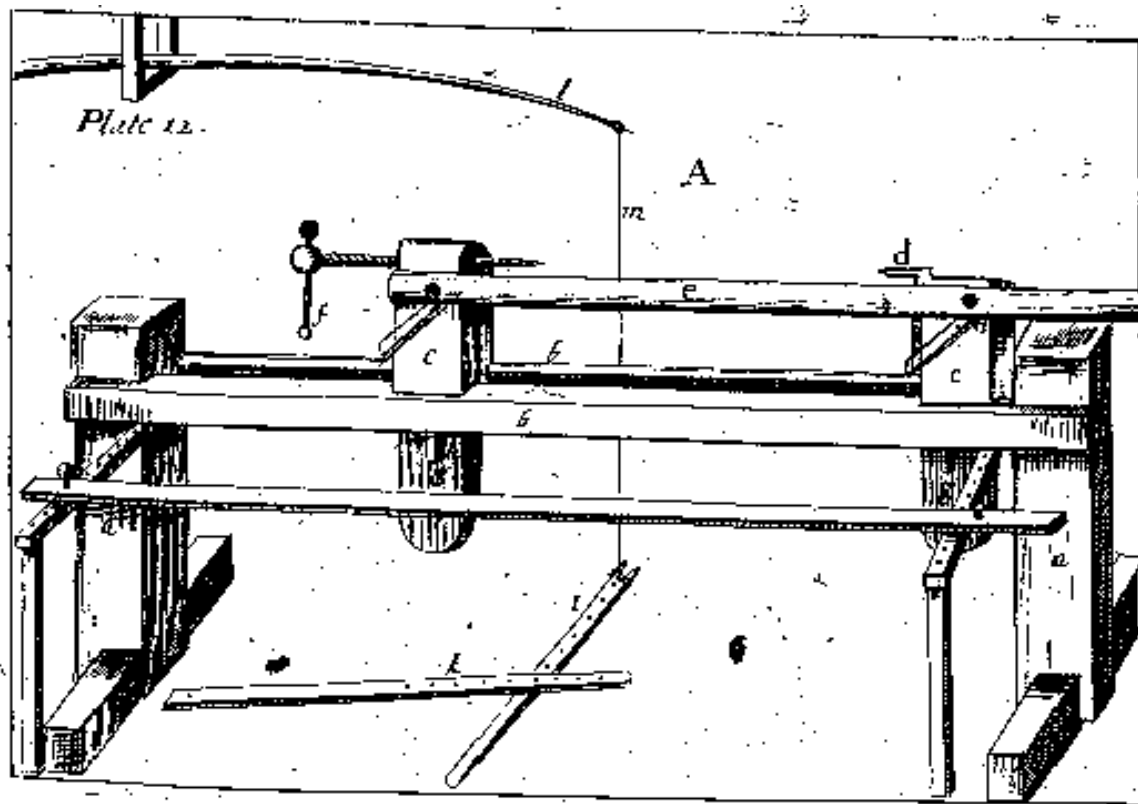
A diagram of a spring pole lathe. The component parts are (a) the stiles, (b) cheeks, or sides, (c) puppets, (d) pike, (e) rest, (f) screw (Moxon 1703:168).
